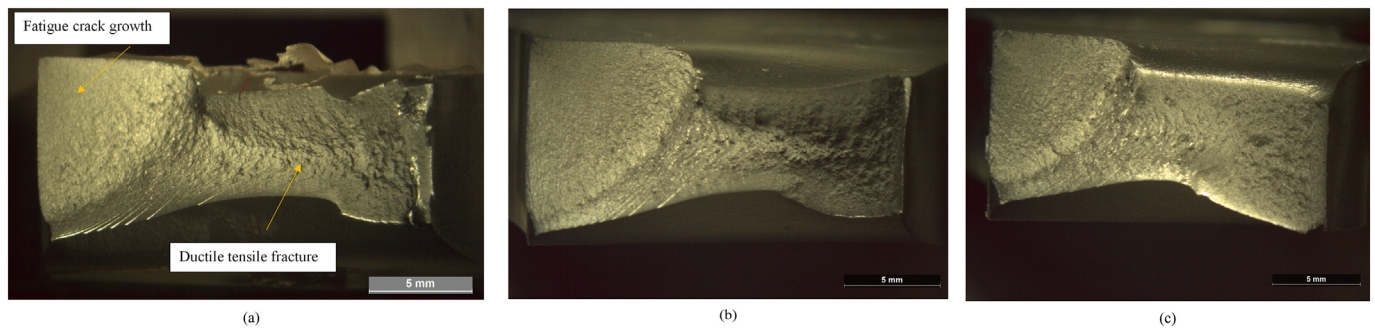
Fracture surface of uniaxial fatigue samples with (a) 0%, (b) 5%, (c) 10% pre-strain.
